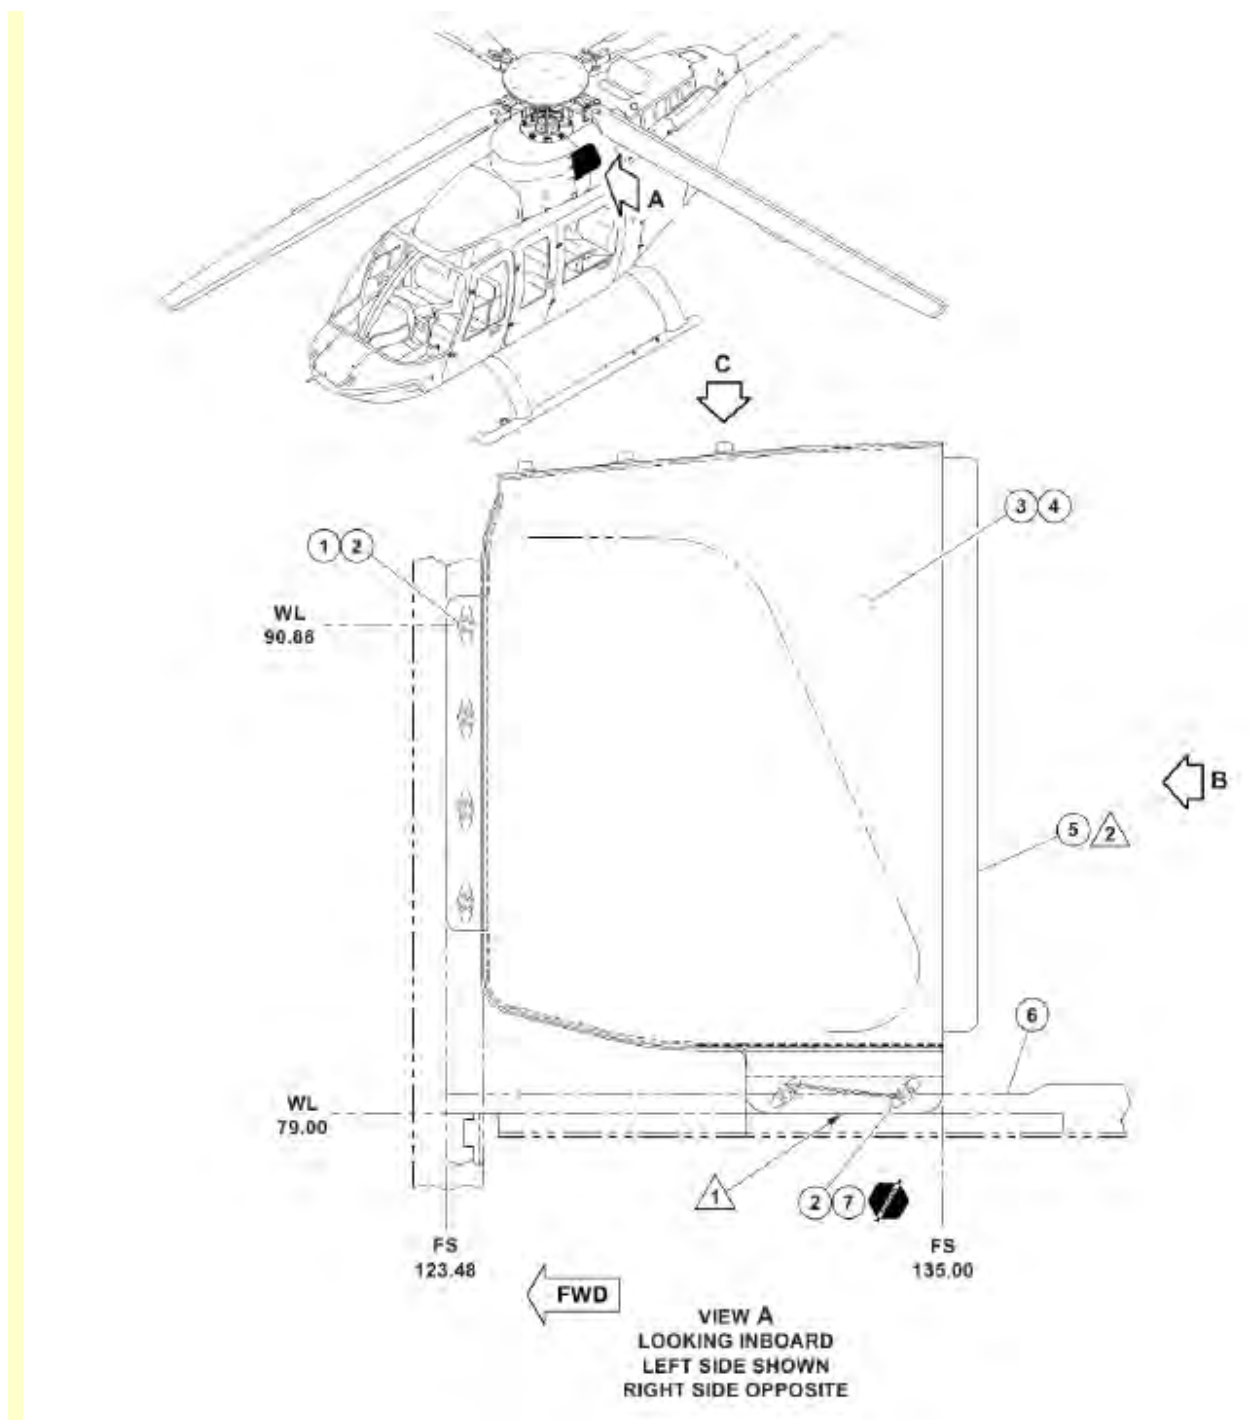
Snow deflector kit installation (Sheet 1 of 3)
